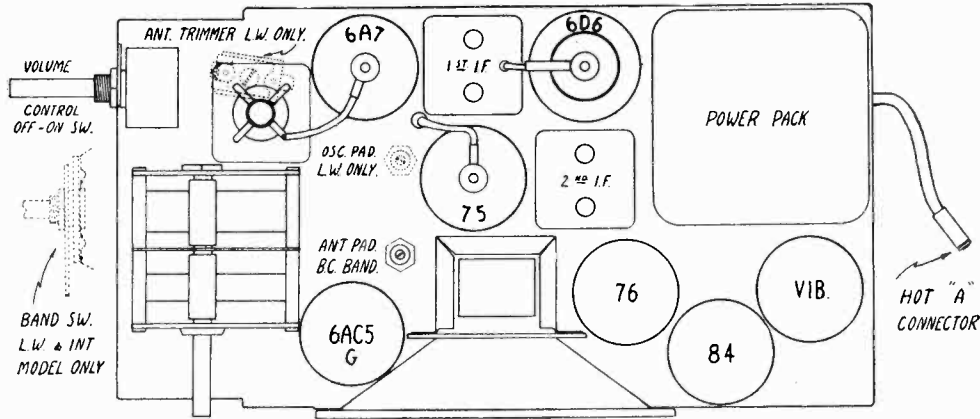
LOCATION OF PARTS ON TOP OF CHASSIS
